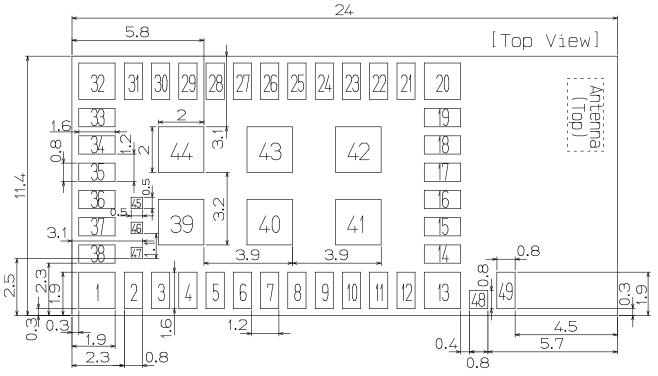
Detailed Pad Dimensions (For both SN8000 and SN8000UFL) (top view)
